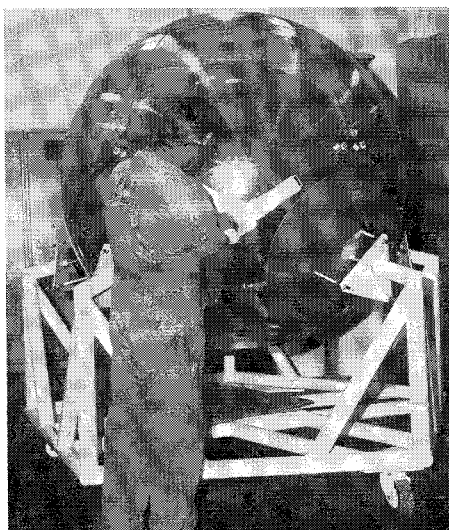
Assembly of 5.5-ft-diam acrylic capsule.
